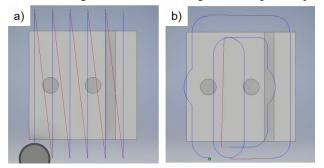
Face milling strategies with: a) Shopmill generated tool path; b) individually designed tool path
